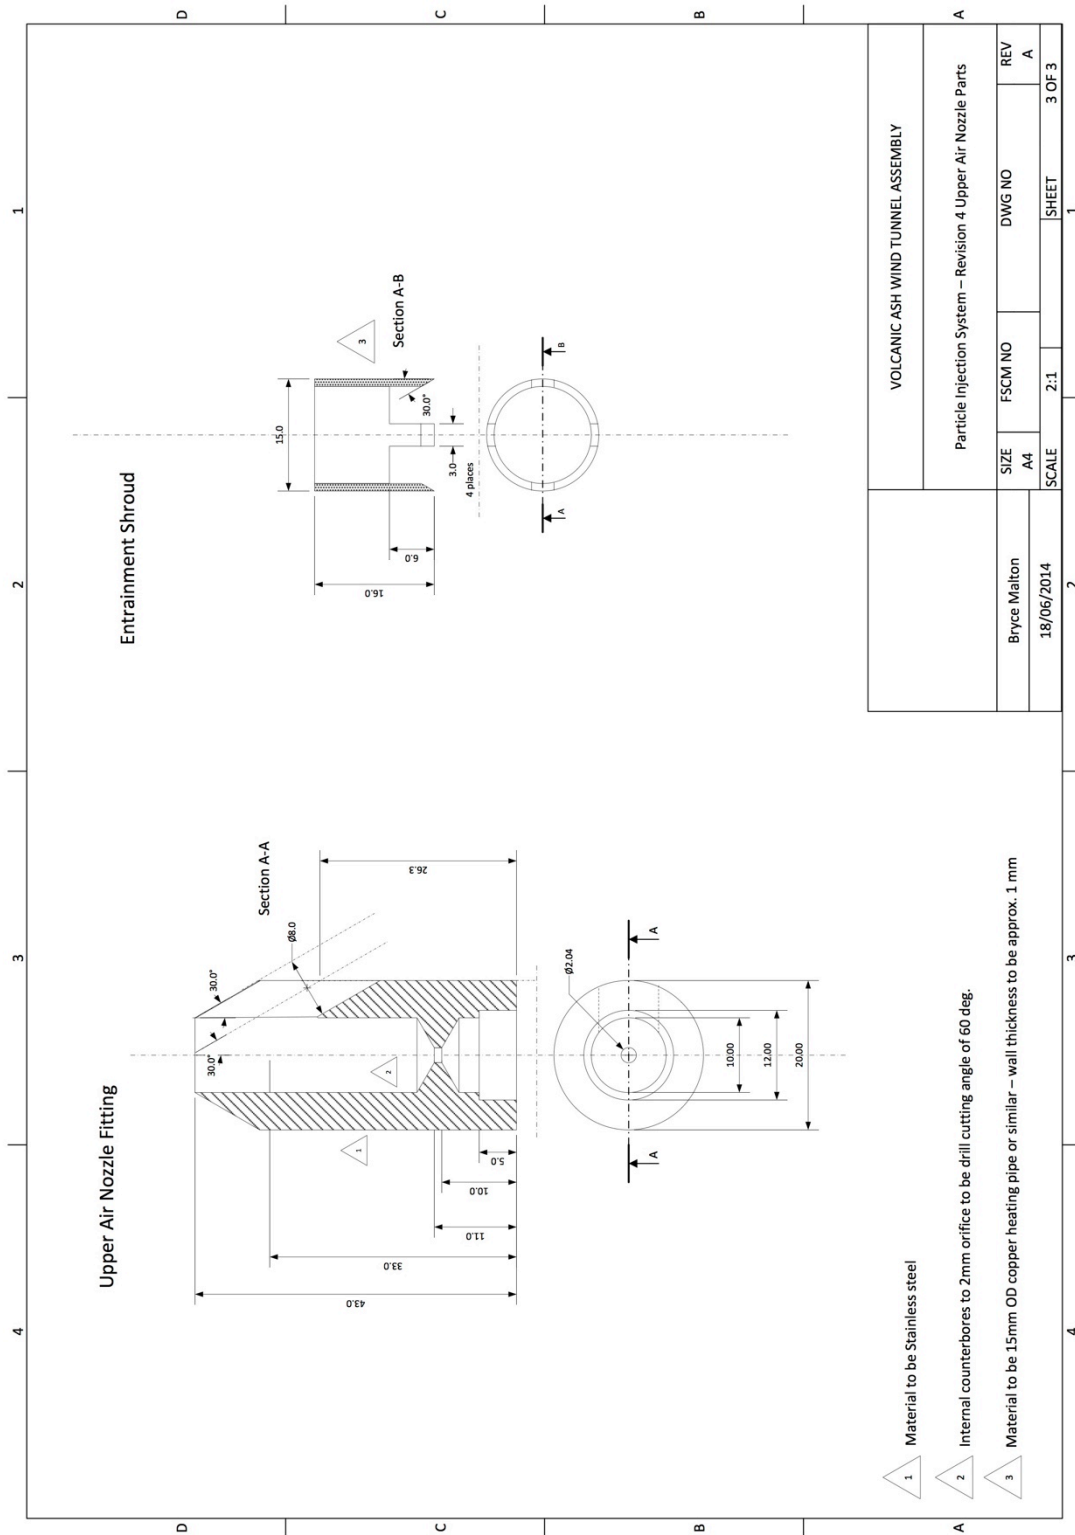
The revision 4 high-speed airflow nozzle piece parts.
